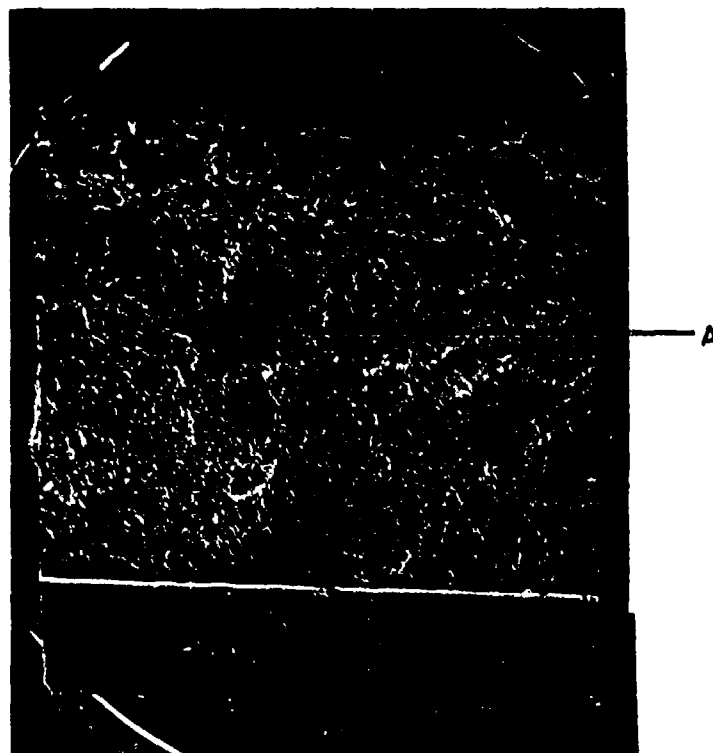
Fracture surface of an A-36 Charpy specimen tested at -196°C , 7x
